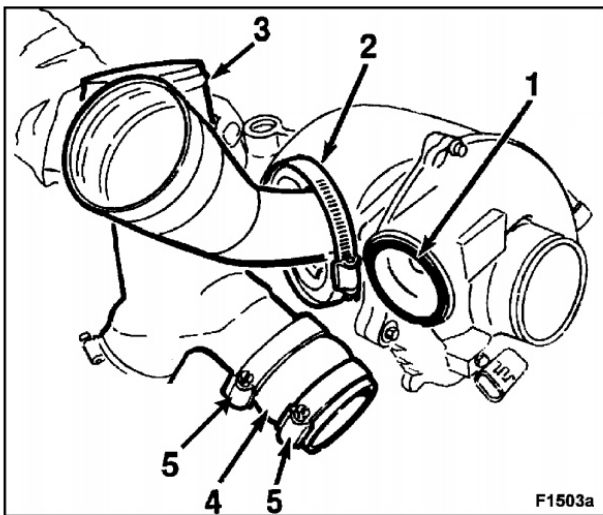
Removing Turbocharger Air Charging Tube/Crossover Pipe Assembly
